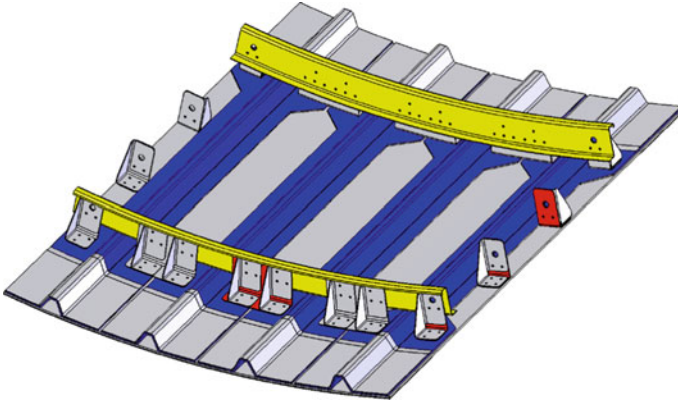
CAD drawing of curved panels with metallic frames and clips
